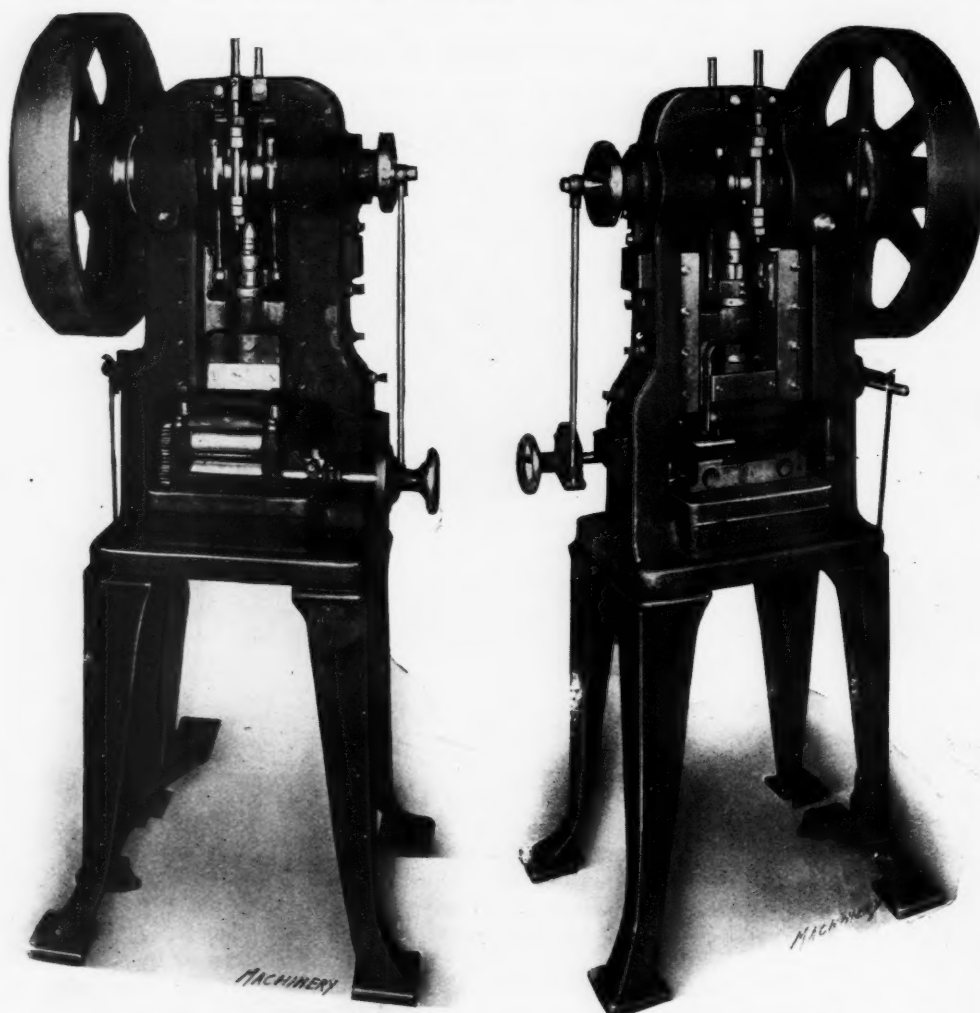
Rear View of Press showing Roll Feed Mechanism
